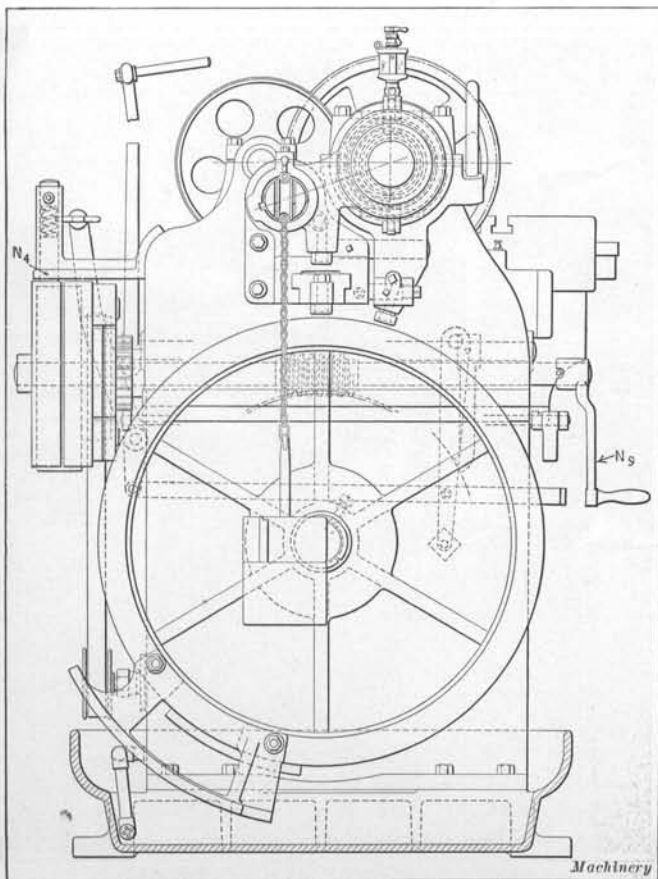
Rear End View, showing Power Feed Mechanism and Main Cam Drum
